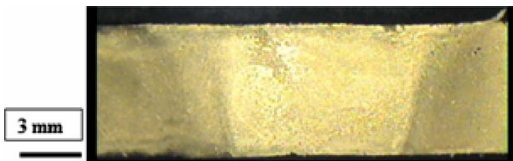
Weld using 1/4 in. threaded tool and force control via traverse speed
